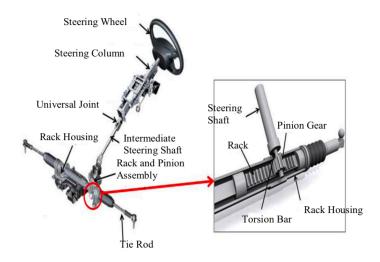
STEERING GEAR DESIGN AND A SHAFT FOR A RACK AND PINION STEERING SYSTEM
